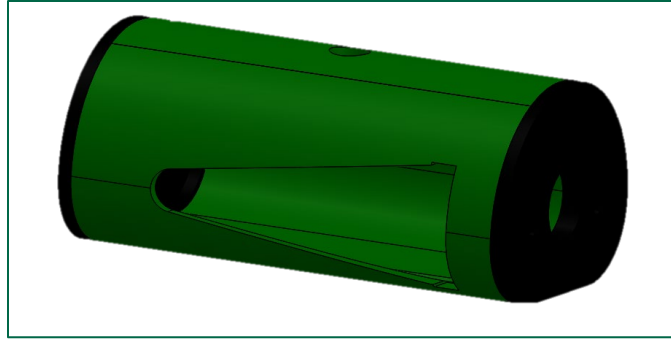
Render of rover body reverse, with stabilization leg cutout and motor shaft opening visible.
